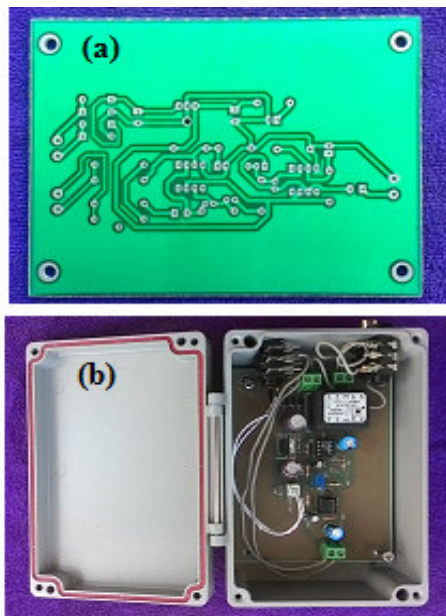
a) Printed circuit board, b) printed circuit board assembled with electronic components in a metal box.
